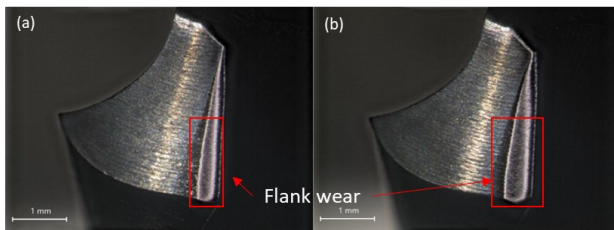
Flank wear (a) dry machining (b) machining with chilled air
